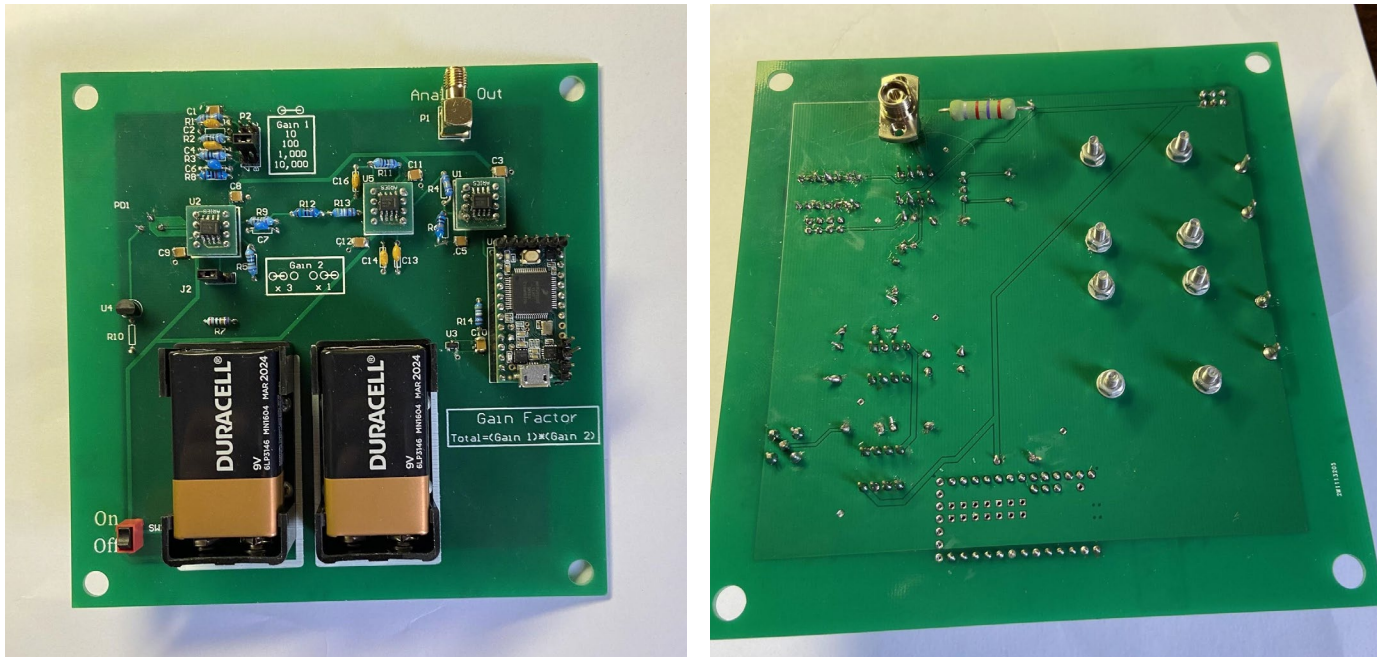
& 24: Final PCB Prototype, Top View (Left) and Bottom View (Right)
